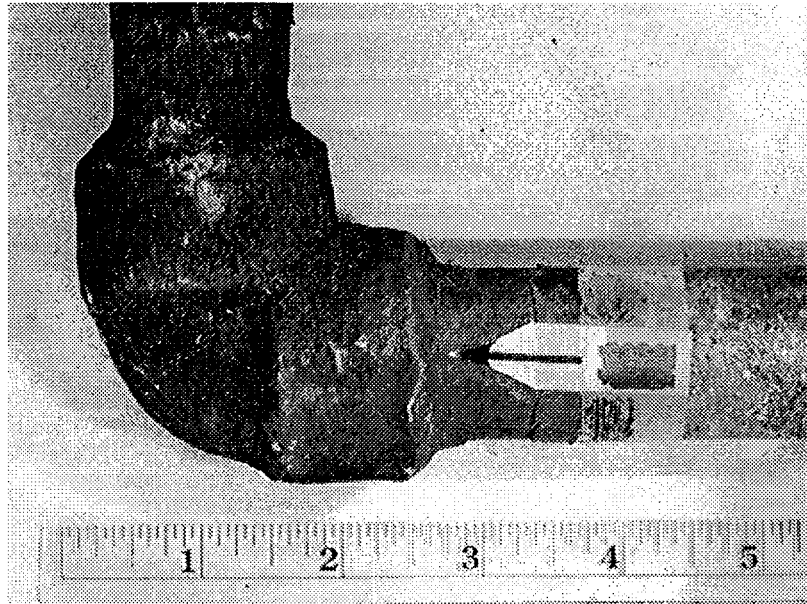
Photograph showing piping components in the as-received condition. Arrow points to leaking socket weld.
